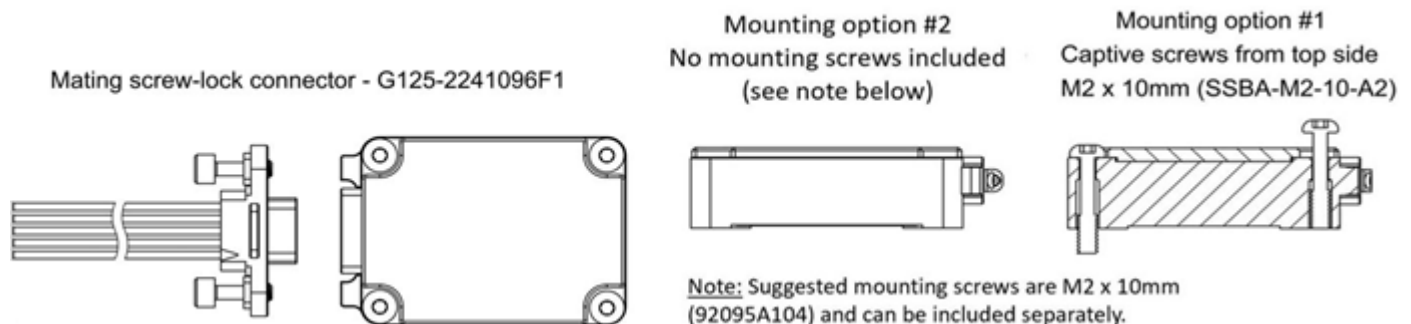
KERNEL-100/102 Outline Drawing
